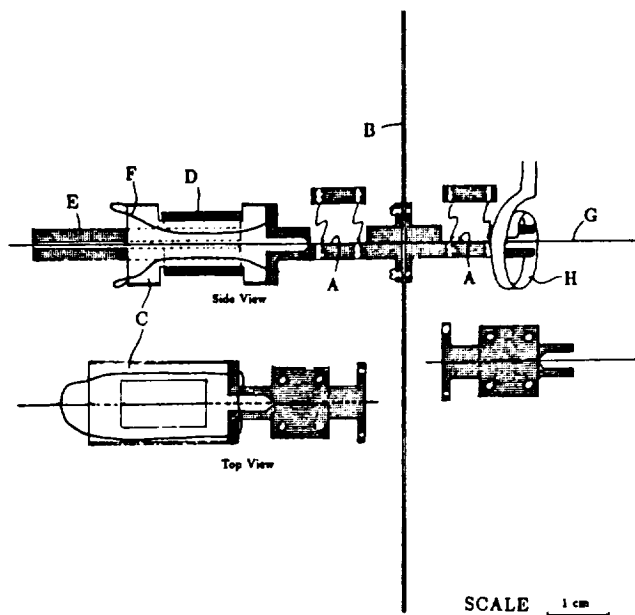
Rotor assembly with top and side views. A regions are the copper axle clamping areas. Brass 2-56 screws and epoxy affix the tops of the clamps to the clamping area. B is a side view of the chopper blade. C is the stainless-steel rotor winding substrate; this is soldered to the copper clamp. D and E comprise a side view of the stator plug and copper stator plug heat sink. F is an example of a single-rotor winding. The windings are thermally sunk by passing over the end of the copper clamp. The winding path farthest from the blade must allow for the insertion of the stator plug. G is the piano wire axle. H is a perspective view of the copper rotor heat sink. One end is soldered to the copper clamp; the other is thermally sunk to a LHe cold stage.
